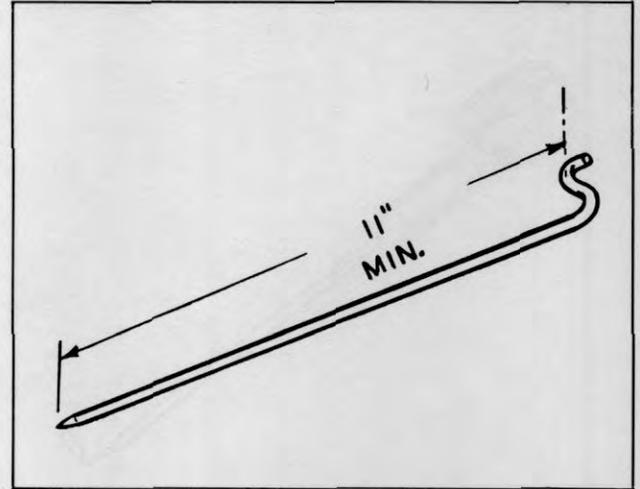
Typical Pusher Rod - Tool # 0-3 (Used only in connection with type "T" Chatillon Spring Tension Gage).
